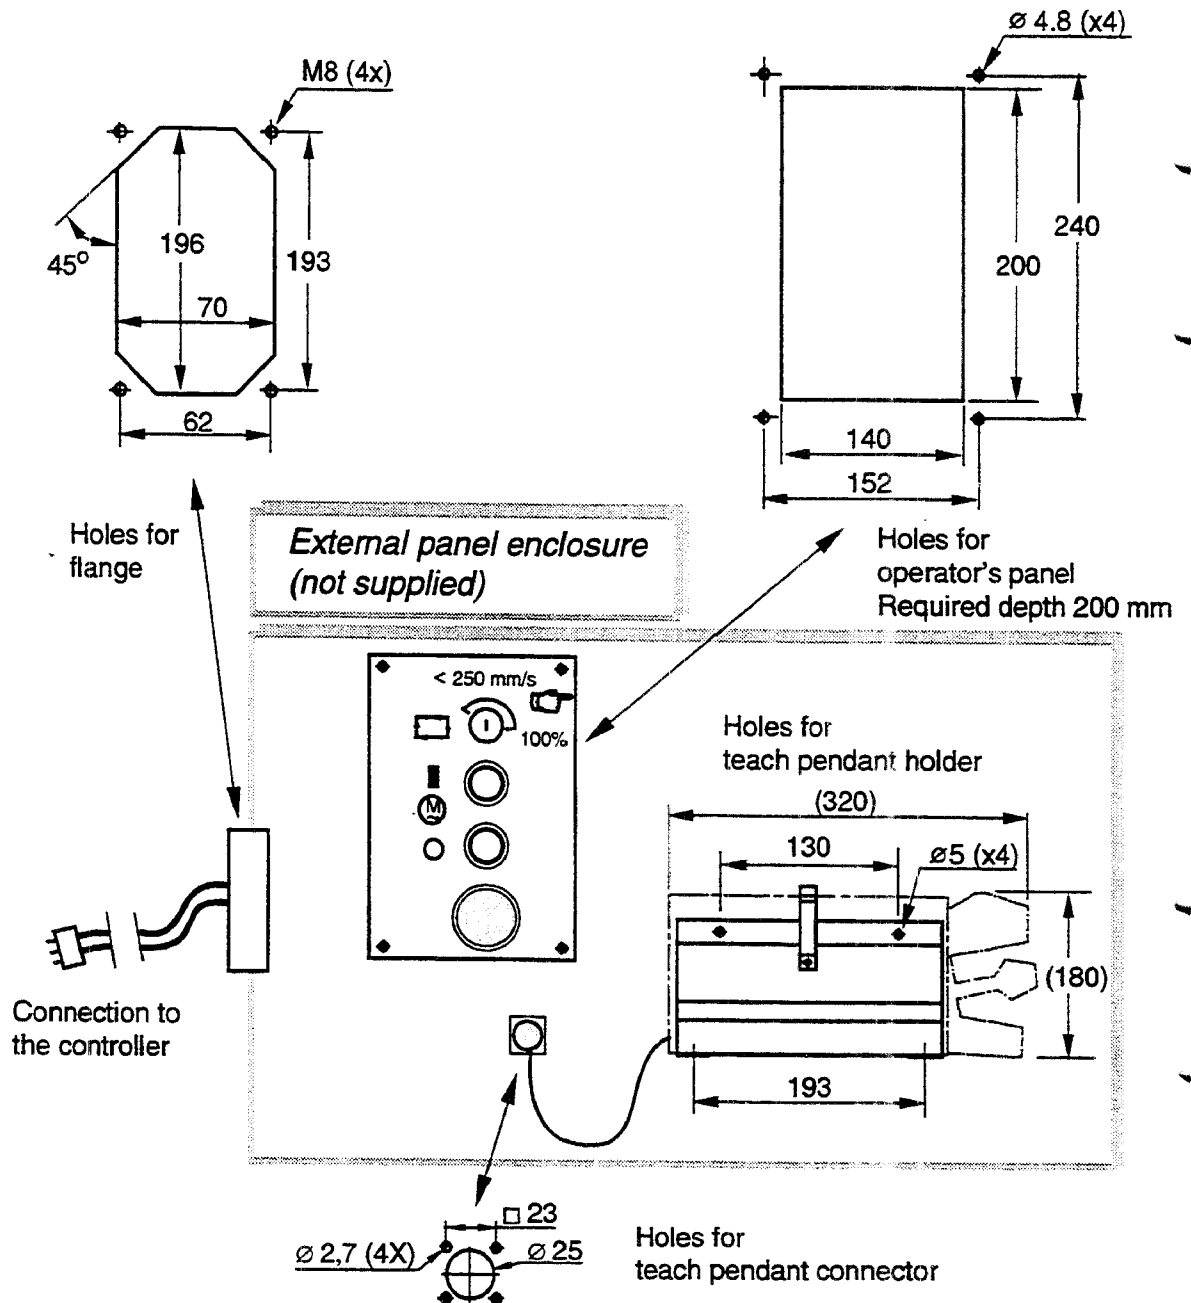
Required preparation of external panel enclosure (all measures in mm).
